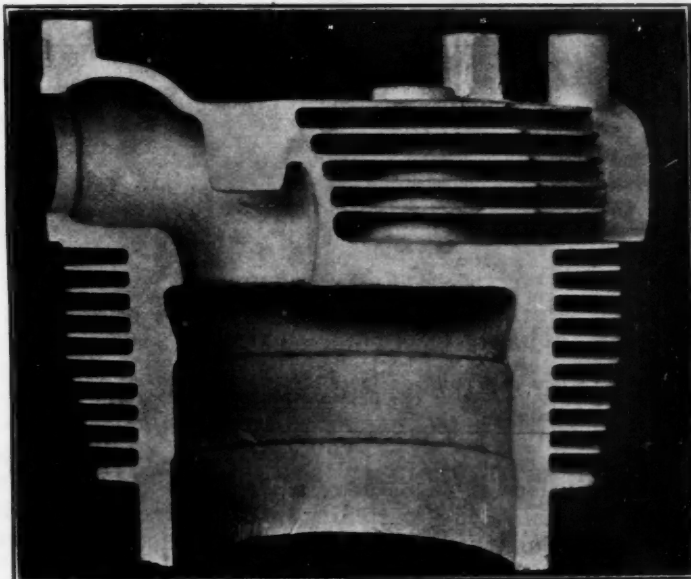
CROSS-SECTION OF A CYLINDER-HEAD CASTING FOR AN AIR-COOLED ENGINE
